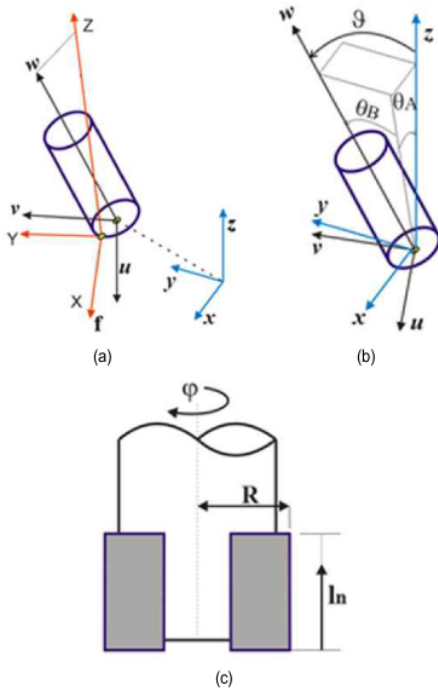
(a) Geometry of a flat-end cutting tool; (b) tool orientation relative to GCF; (c) geometry of a flat-end cutting tool [23].
